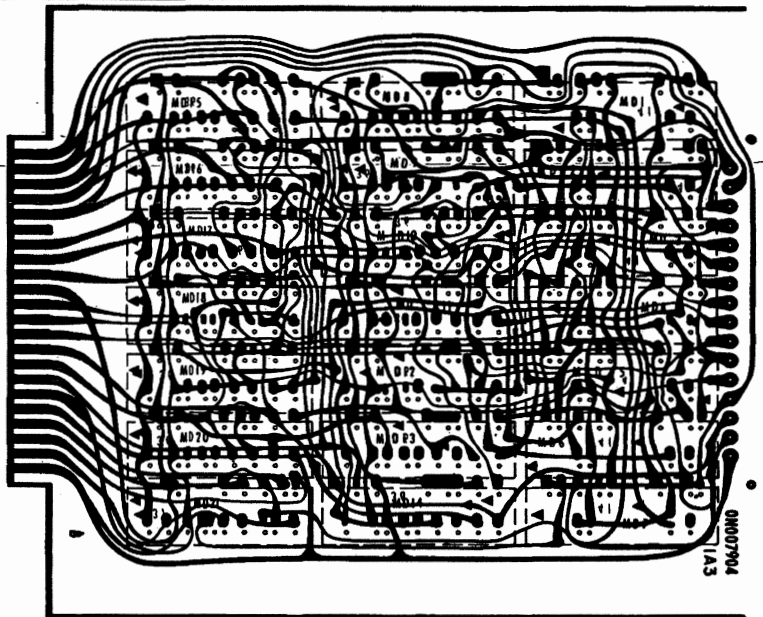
Card E-AJM Printed-Circuit Layout.
